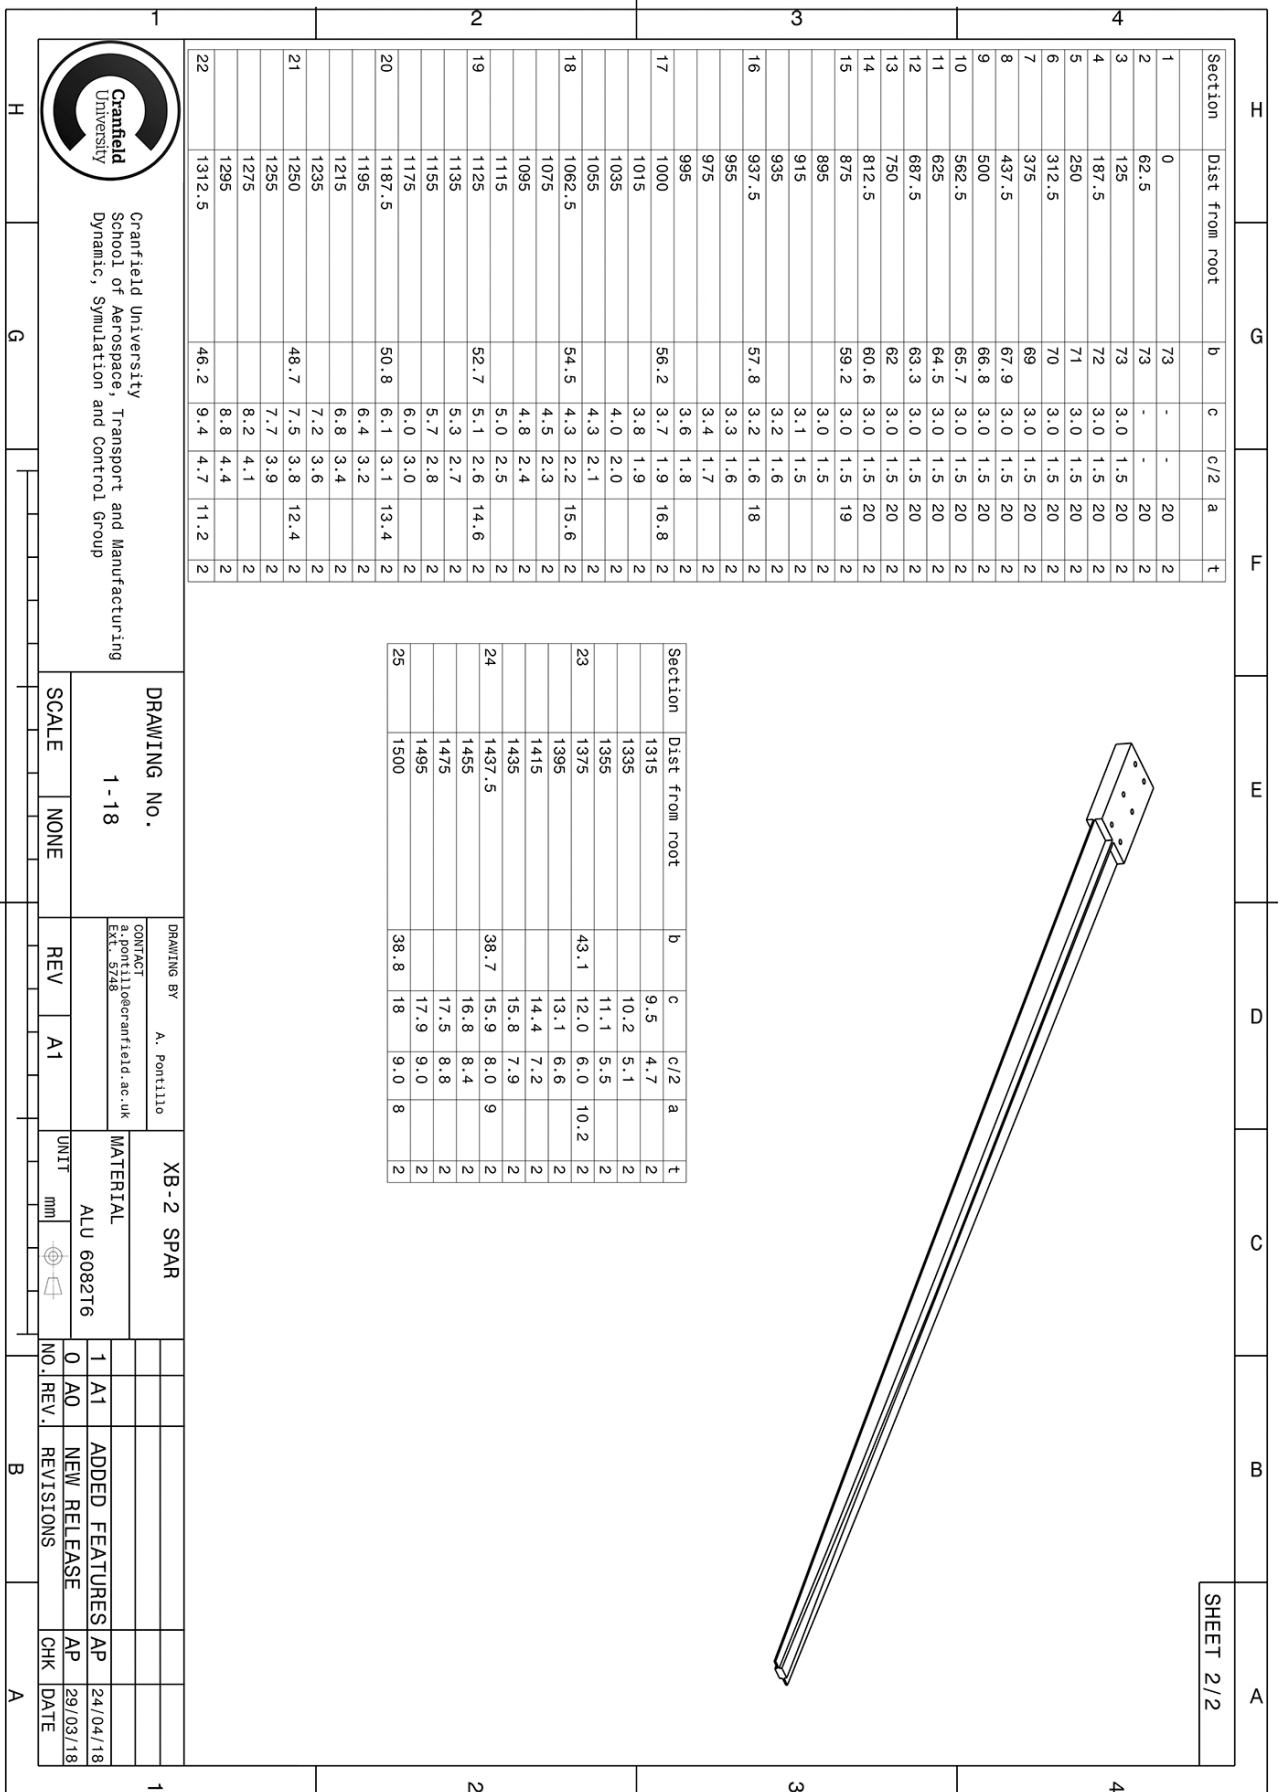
Manufacturing drawing of XB-2 spar. Sheet 2/2.
